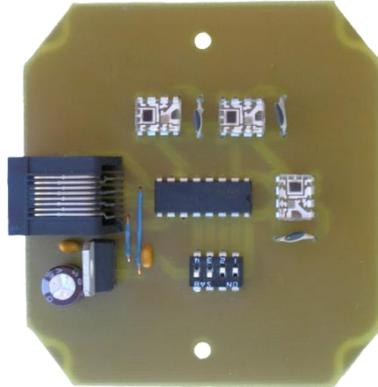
SENSOR BOARD'S PHOTOGRAPH.
